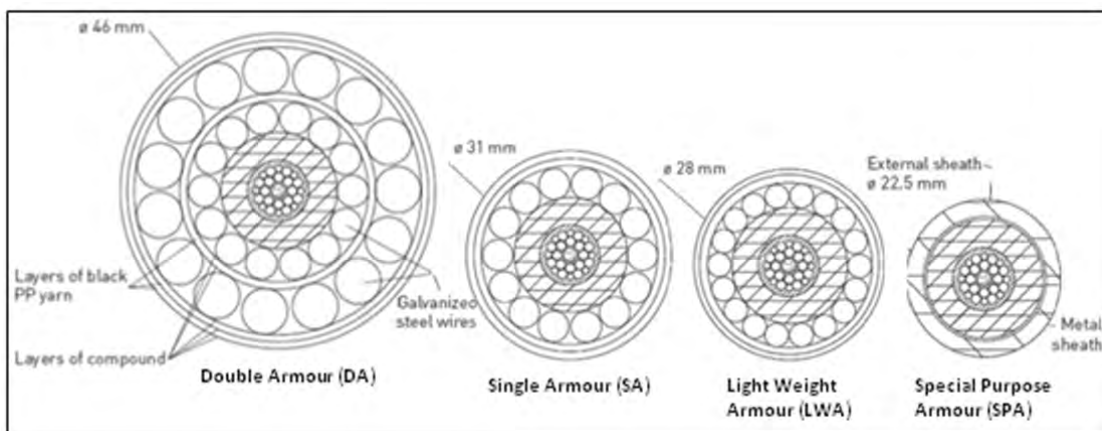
Indicative cross-sections (approximately full size) through the cable types listed in the line drawing.
